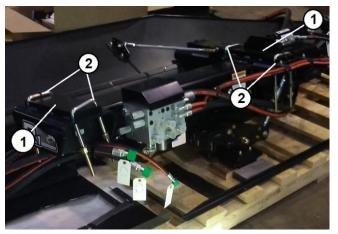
U-Bolt Storage Location Key 1 – Plates Key 2 – U-Bolts
